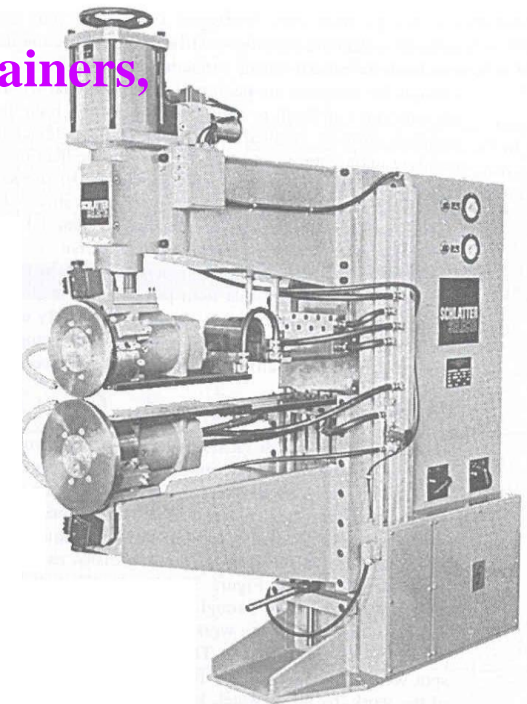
Typical commercial seam welder. (Courtesy H. A. Schlatter AG.)
